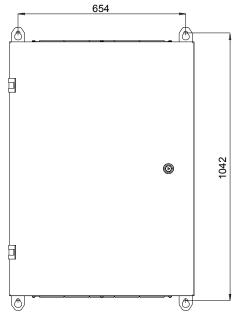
Installation hole dimensions for wall mounting of BCB box of 300/400kVA UPS (unit: mm)
